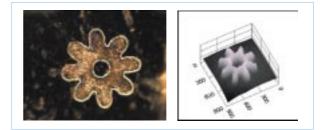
A gear manufactured by micro electrolytic machining technology (Diameter: 600µm)
